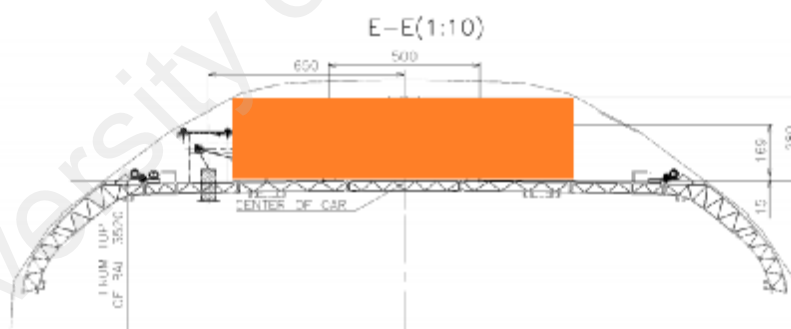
AT200 Cross Section of Available Roof Space (Hitachi Rail, 2016)
